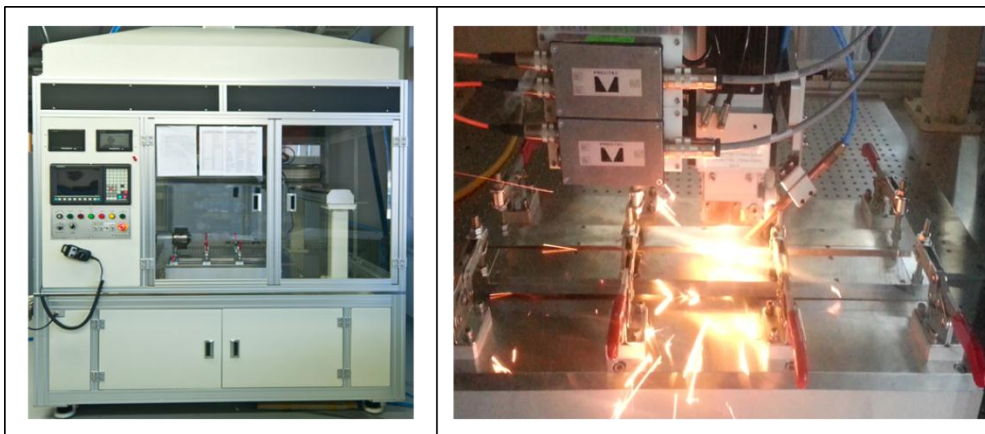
Fiber laser welding system (left) and welding with clamping (right)
